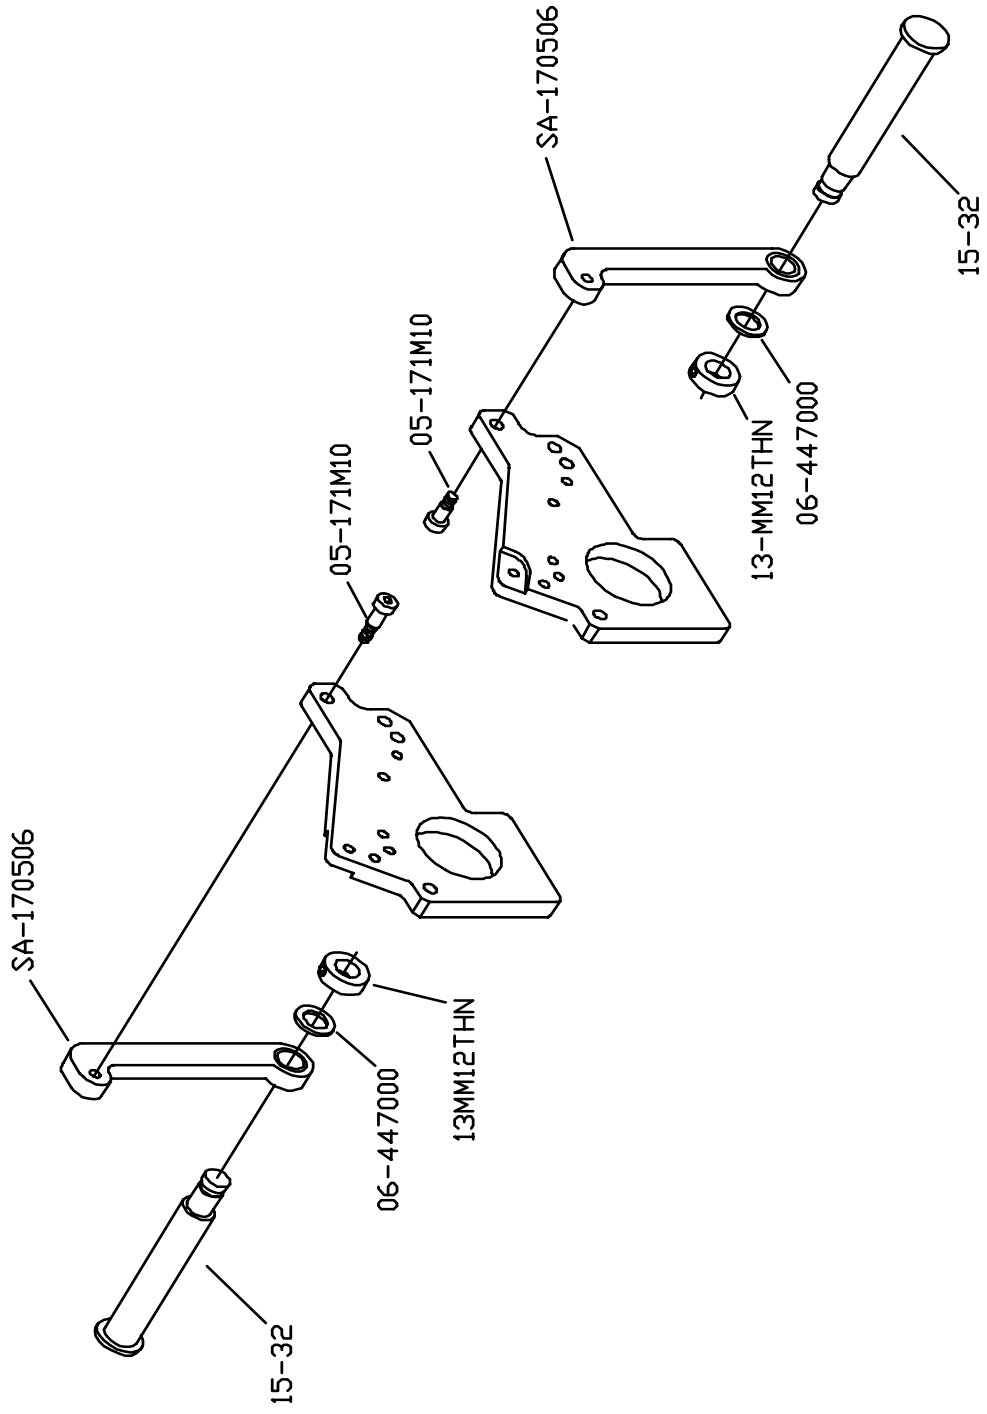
PLATE CYLINDER GUARD MOUNTING ASSEMBLY
